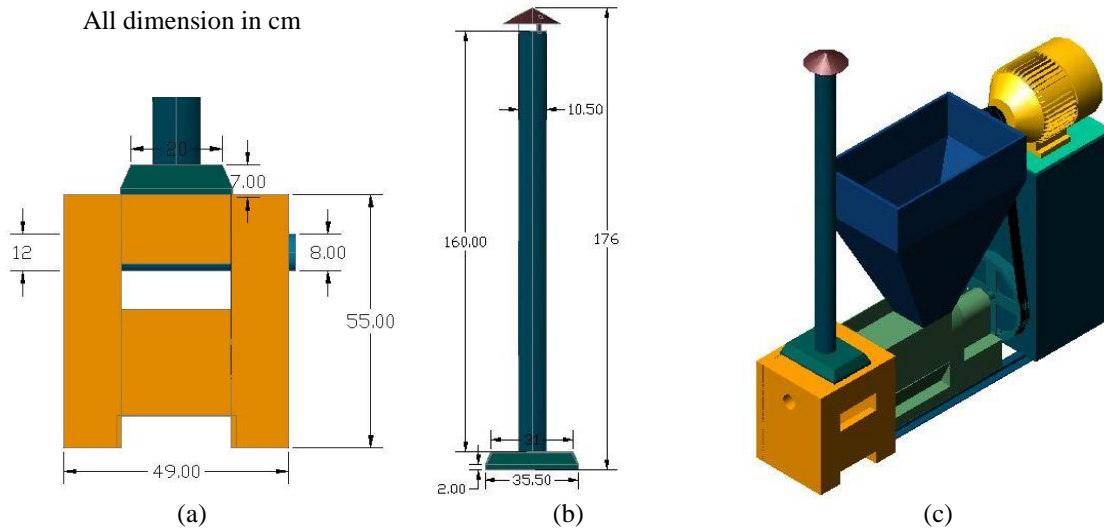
Overall dimension of die-stove (a) and chimney (b); and (c) isometric view of new setup
